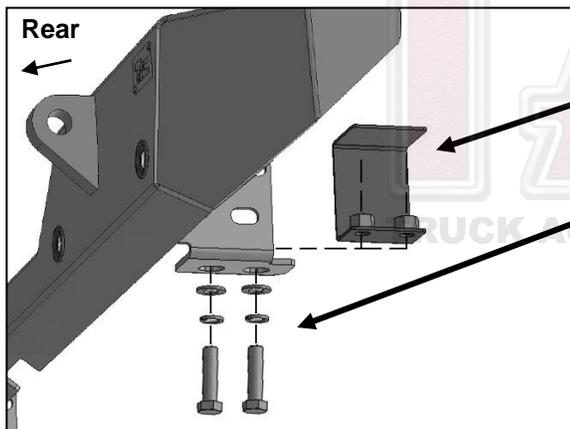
Insert U-Bracket into end of passenger side frame. Line up weld nuts with holes
